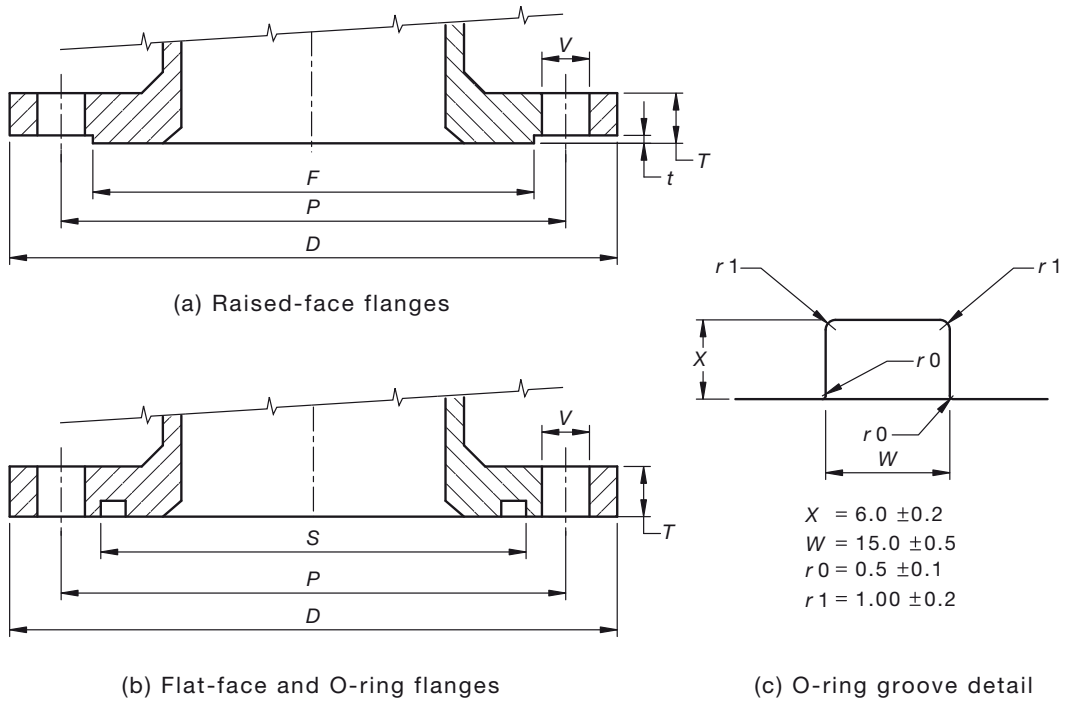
(in part) DIMENSIONS FOR STEEL FLANGES—PN 16
